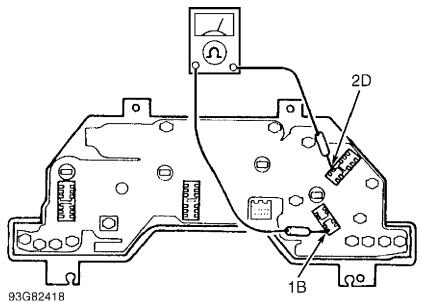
Identifying Instrument Cluster Connector Terminals Courtesy of Mazda Motors Corp.
